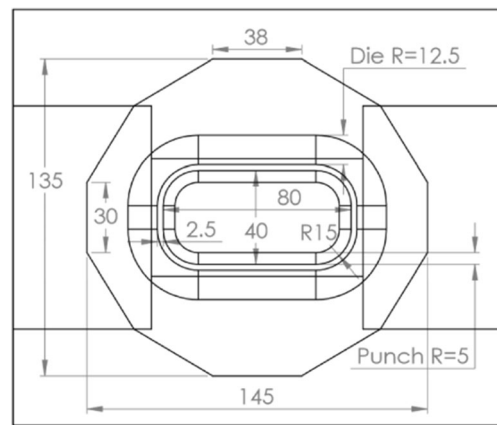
Dimensions of die set and initial blank used for rectangular box studies in the present analysis. All dimensions in mm
